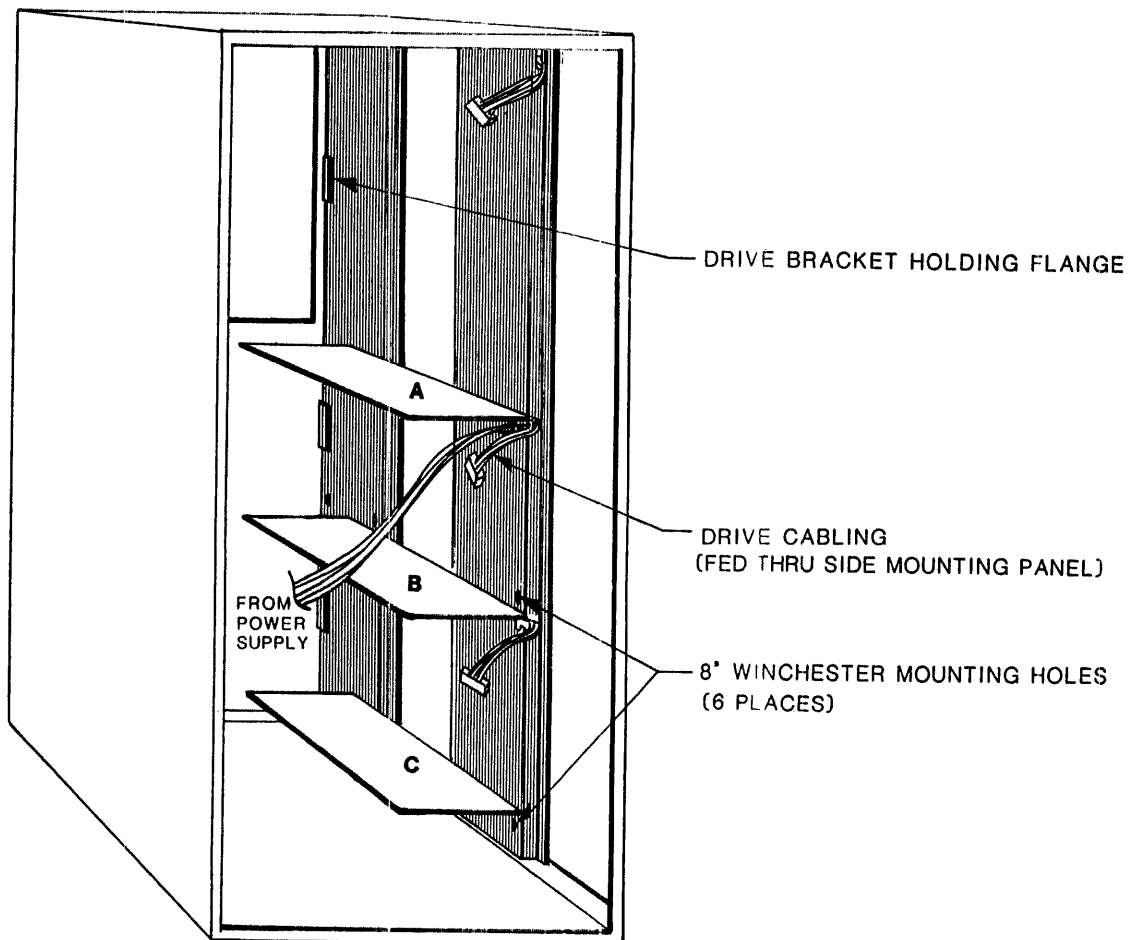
DRIVE MOUNTING LOCATIONS
